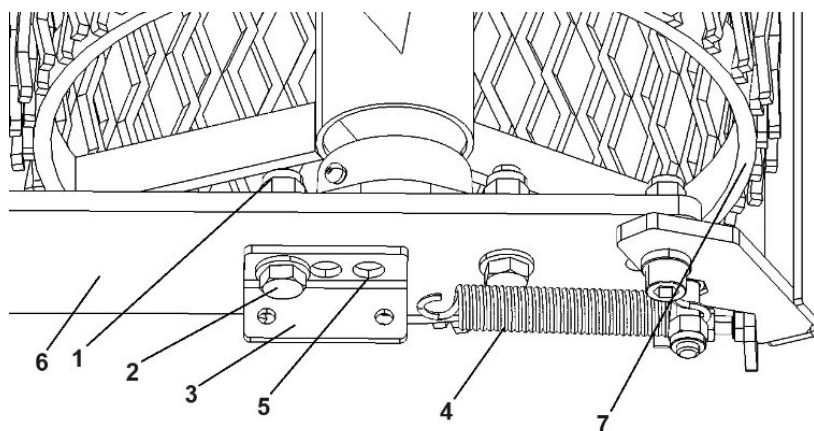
Adjusting the scraper's contact pressure: 1 – nut, 2 – bolt, 3 – adjusting bracket, 4 – spring, 5 – adjusting hole, 6 – arm mounting the mesh roller, 7 – mesh roller
